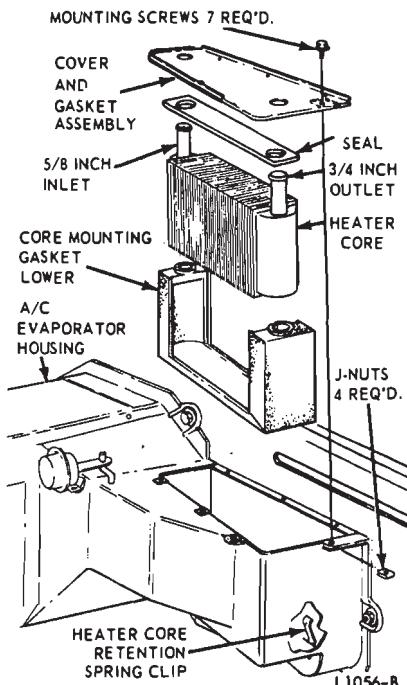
Heater Core Removal—Ford, Mercury and Meteor
